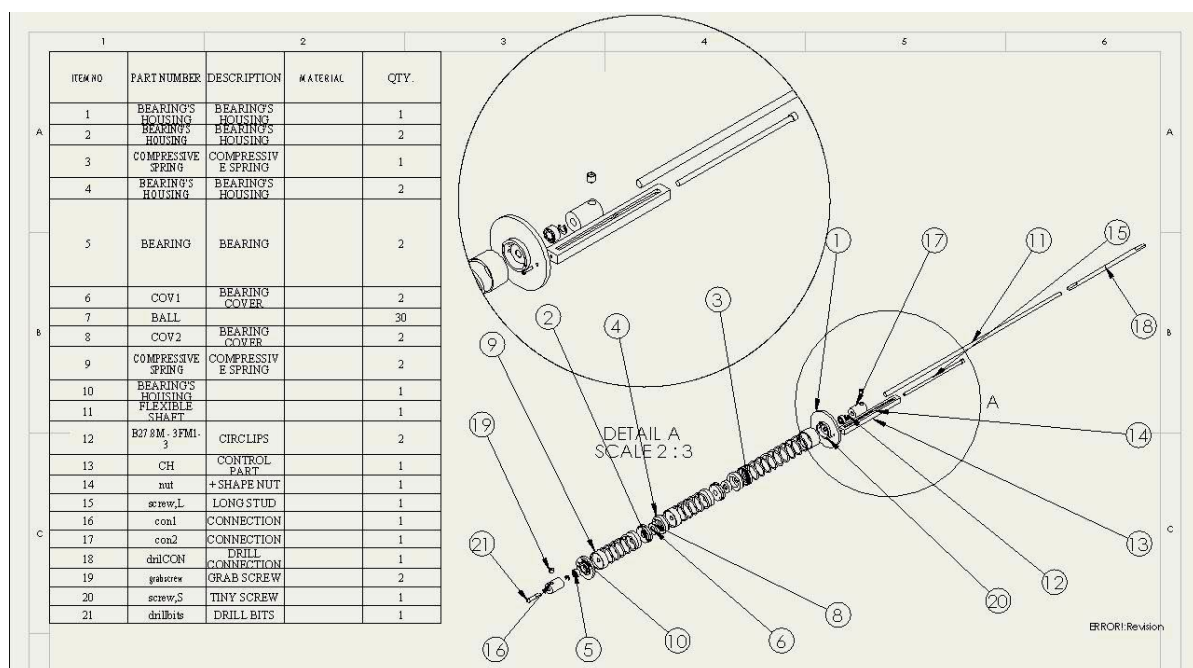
A detailed engineering drawing show the entire parts of the flexible surgical drill prototype. The pull-bend mechanism is highlighted in a circle.
